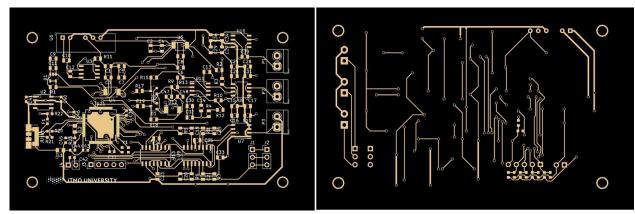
Design and layout of the PCB. Then all elements were soldered manually to the printed circuit board.
